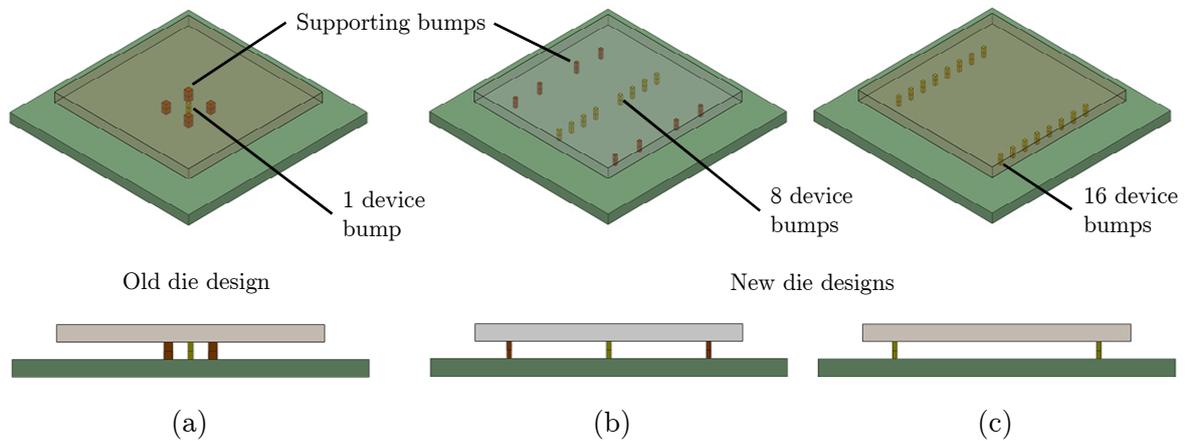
Varactor die designs showing isometric and front views: (a) old version with one device and four supporting bumps; (b) new series varactor die with 16 bumps (8 devices); (c) new shunt varactor die with 16 bumps (all devices).
